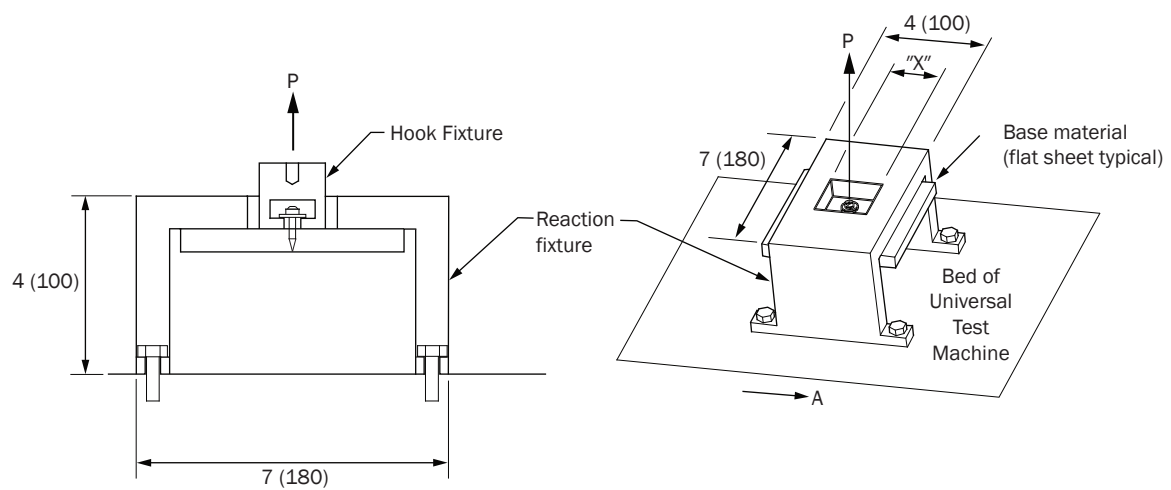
Alternative Tension-Test Fixture with Hook, units – in. (mm)
